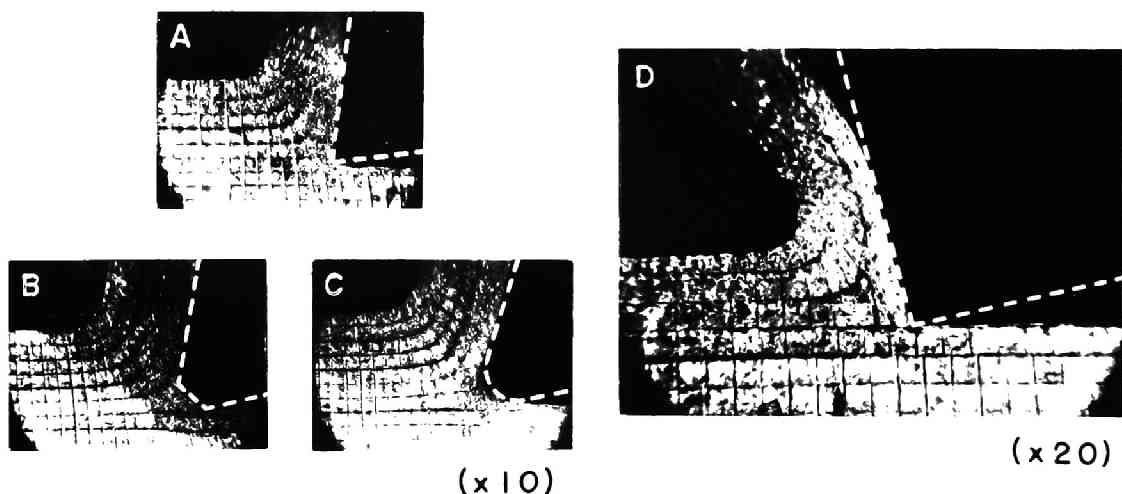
Typical photographs of cutting process for Lipowitz alloy (continuous chip formation) [Tool material, carbon tool steel; A: sharp-edged tool, B: flat-edged tool, C: round-nosed tool, and D: negative rake sharp-edged tool; dry]
